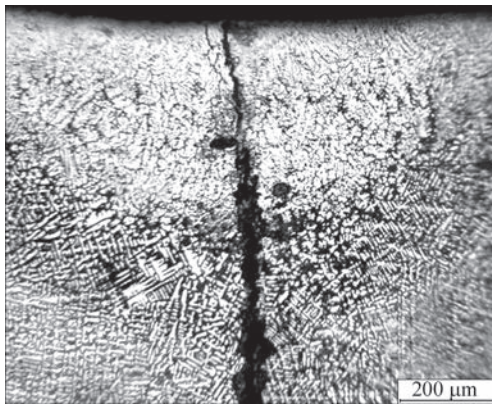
Defects in the form of cracks and pores in the welded joint of multicomponent high-entropy 36Nb–16Cr–16Ti–16Zr–16Al alloy 1.8 mm thick produced by laser welding at laser power of 400 W and welding speed of 0.833 mm/s (50 mm/min)
